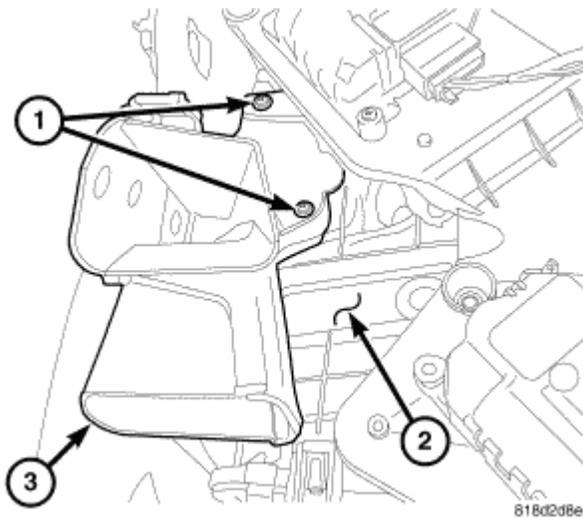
Removing/Installing Screws That Secure Driver Side Front Floor Duct To Driver Side Of Air Distribution Housing And Duct
